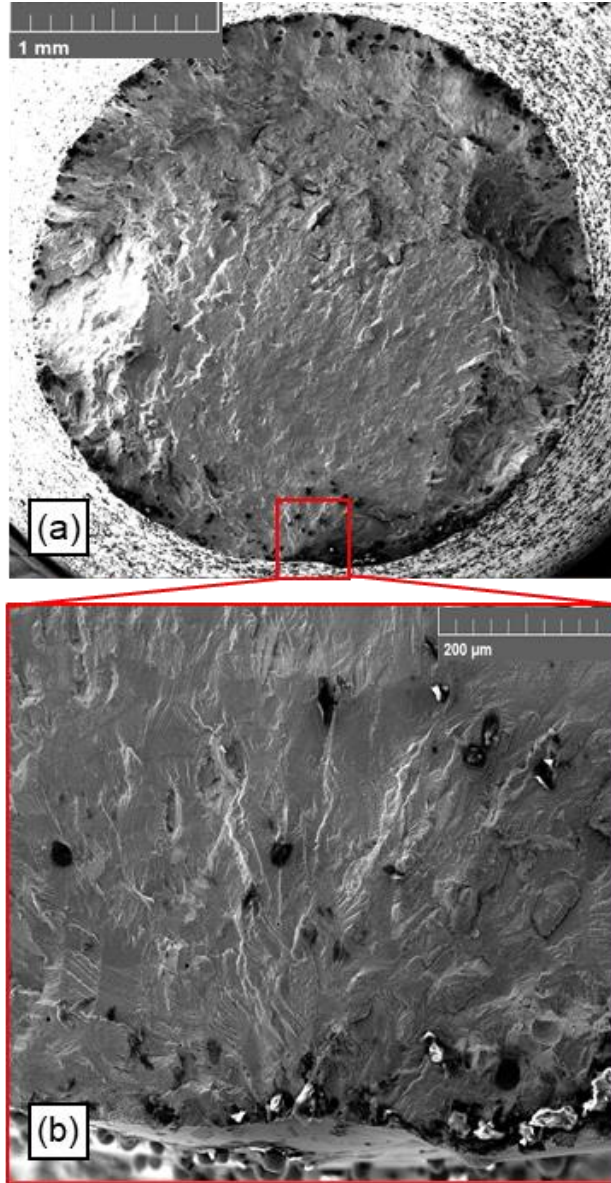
SE fracture surface of an as-built V LB-PBF Inconel 718 specimen tested at $\sigma_a = 350$ MPa with a corresponding fatigue life of $2N_f = 1.74 \times 10^6$ reversals. The overall fracture surface is presented in (a). This specimen failed as a result of a micro-notch on the specimen surface. The crack initiation site is shown in (b).
